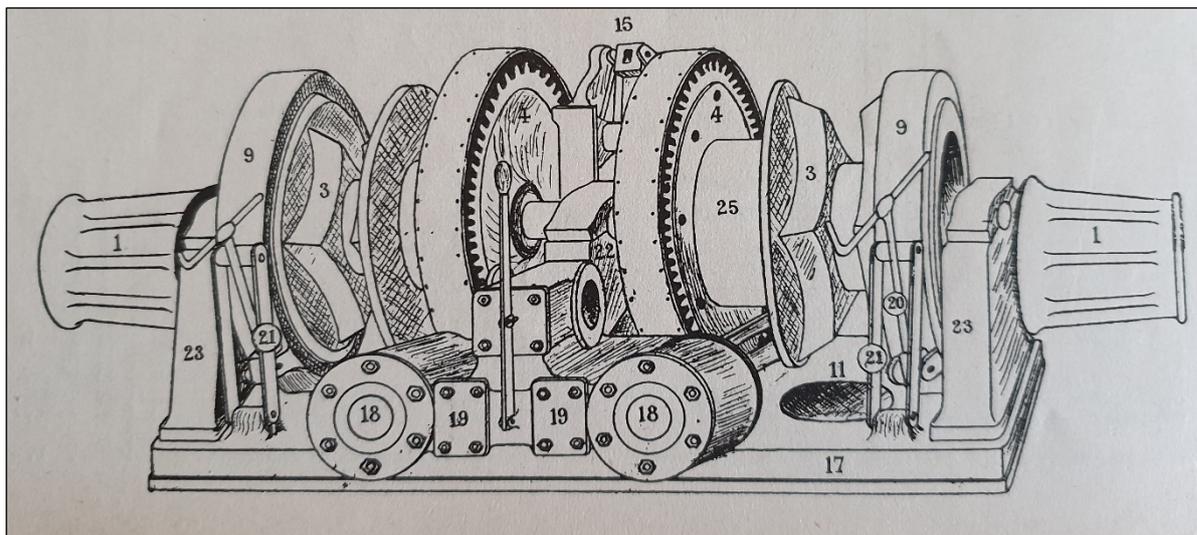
Steam Windlass, showing cable lifters (3) and brake wheel (20) in plan (Image: Bataille and Brunet, 1937: Plate 94)
